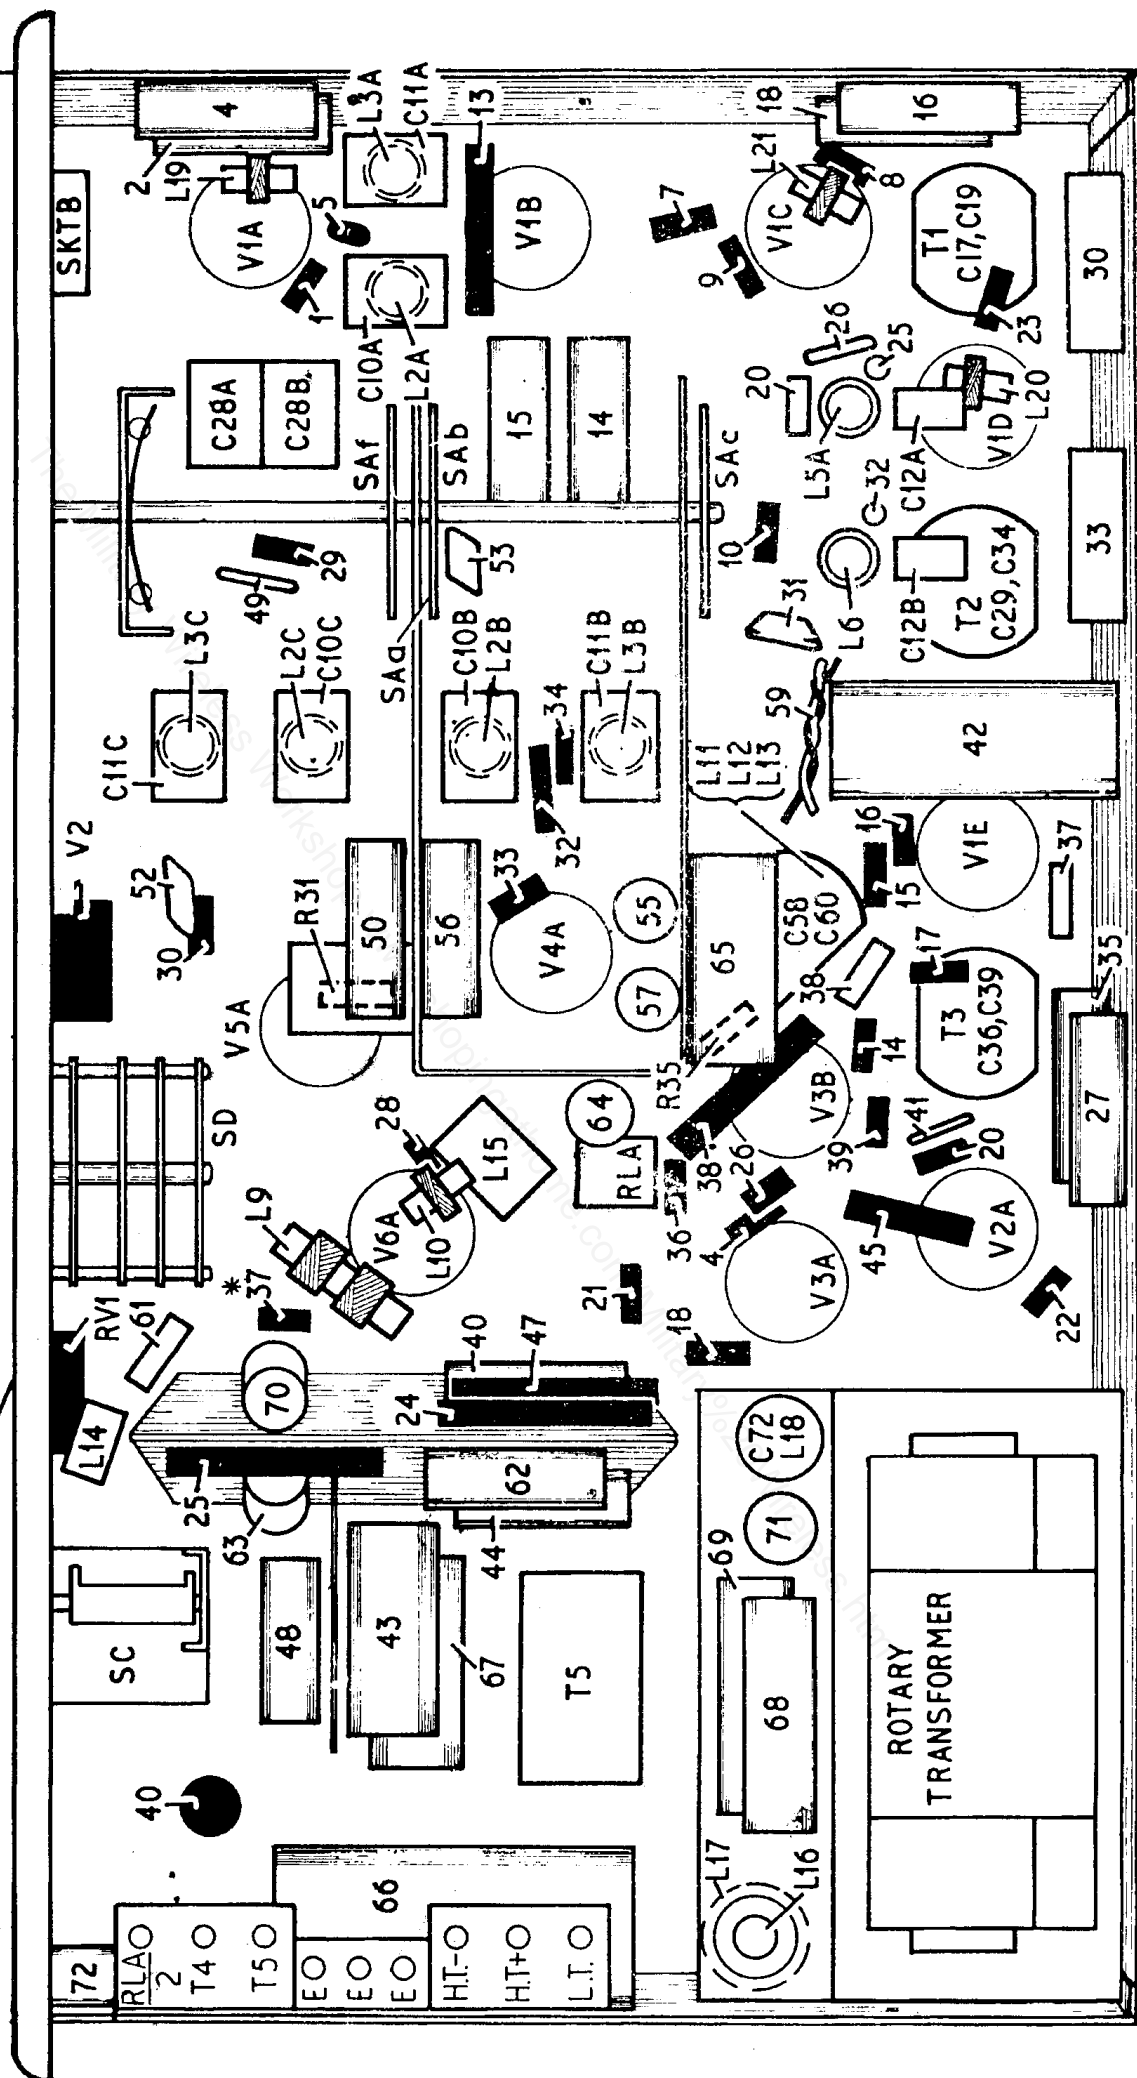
TRANSCEIVER UNDER CHASSIS LAYOUT
